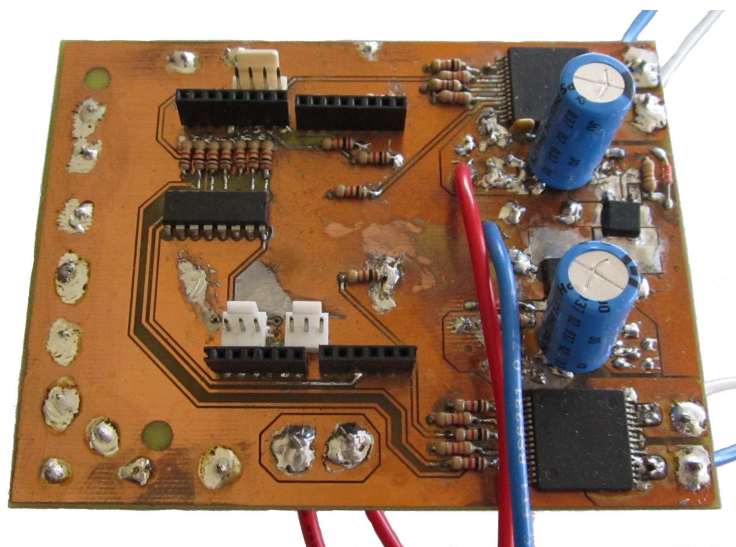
Final version of the Motor Controller Printed Circuit Board.
